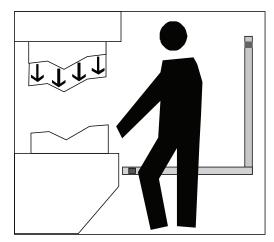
Operators Cannot Reach Hazardous Machine Parts without Passing Through the Protective Field
